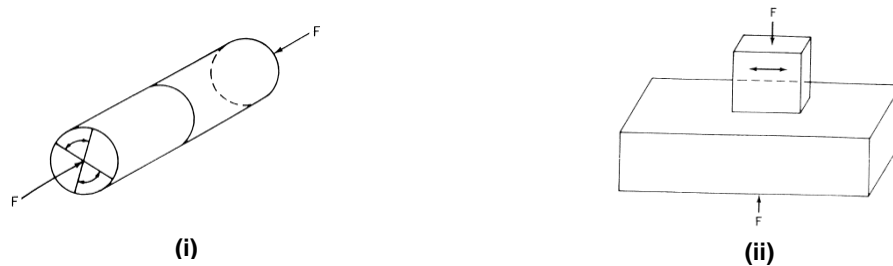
Schematic of rotary (i) and linear (ii) friction welding (Messler 1999).
